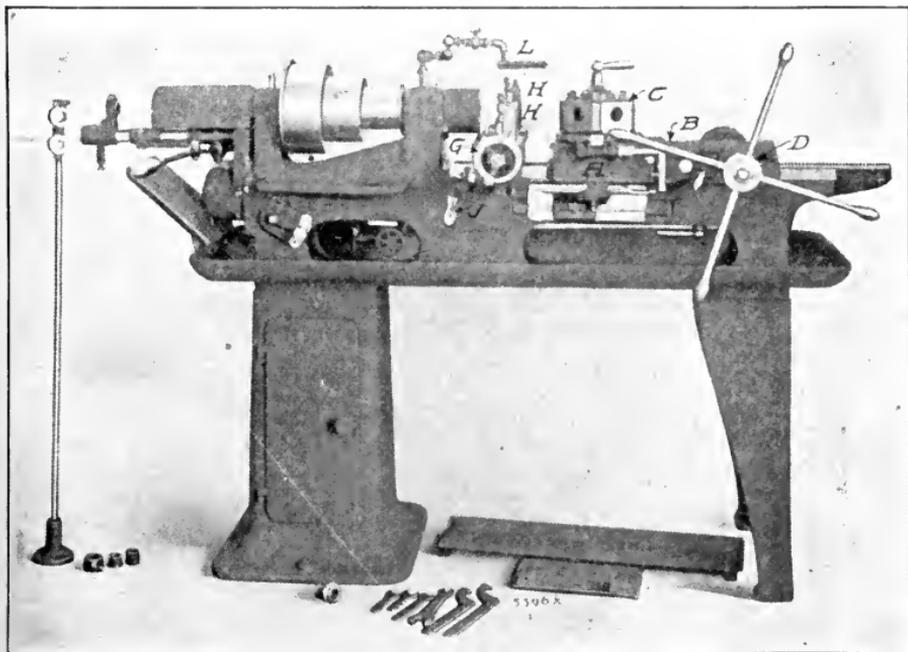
Turret Lathe, Hand-Revolved and Hand-Fed
